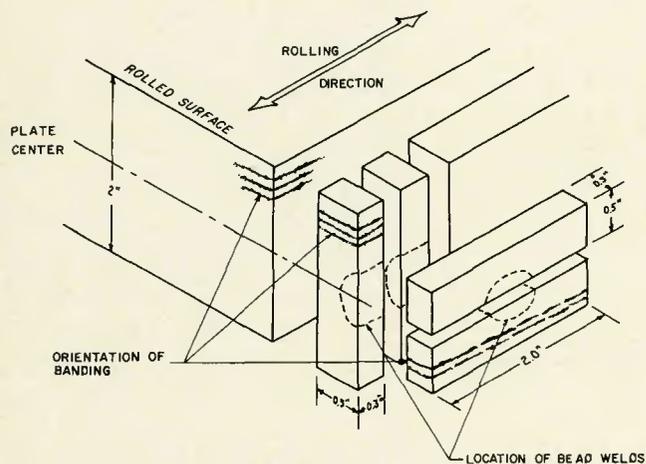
Orientation of cold cracking test specimens machined from the as-received HY-80
